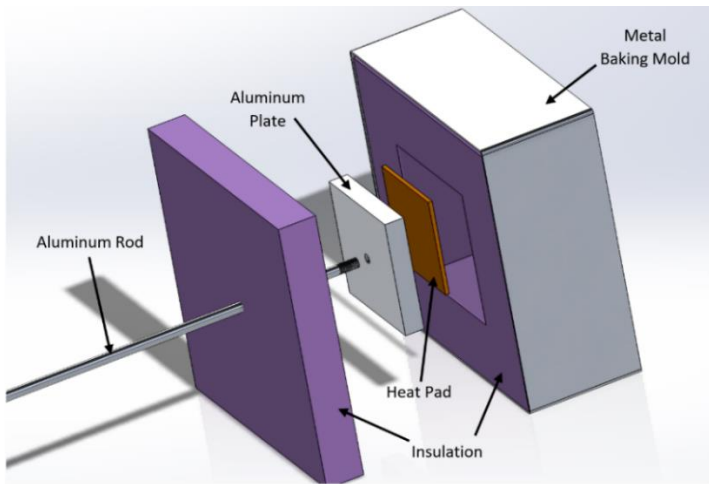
3D SolidWorks model expansion of the fin and insulation assembly.
